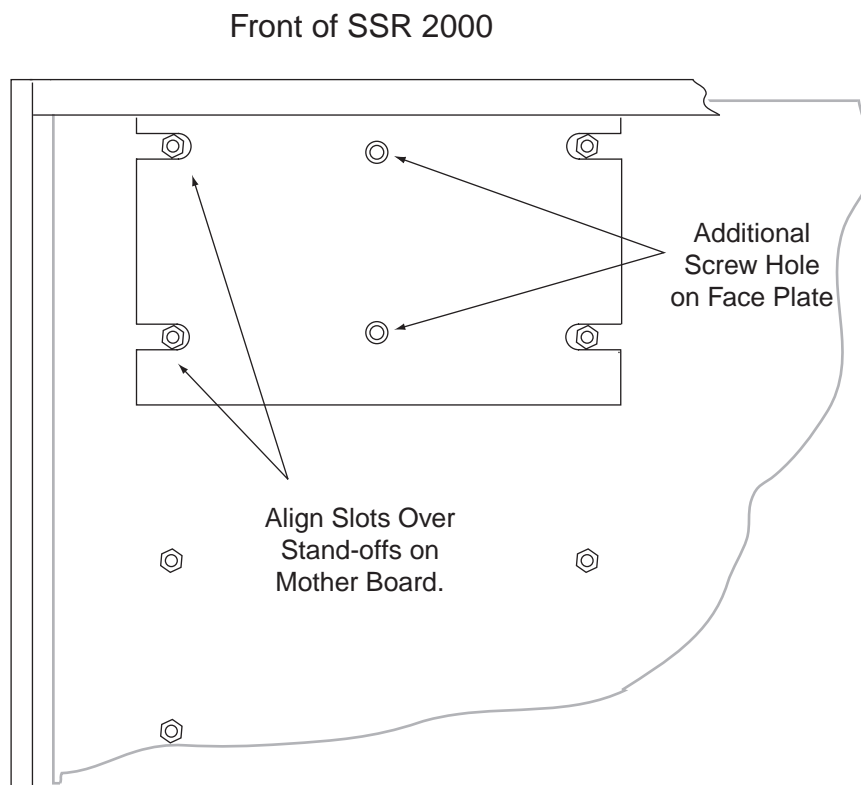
Installing the EMI extended face plate (view from inside chassis)
